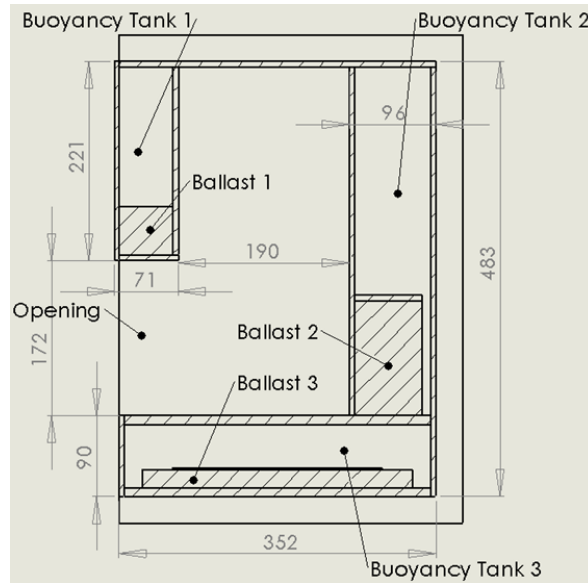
Chamber Cross Section Dimensions and Ballast Locations
